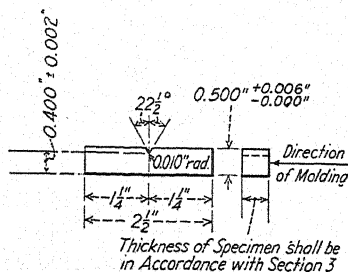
Cantilever Beam (Izod Type) Impact Test Specimen.
